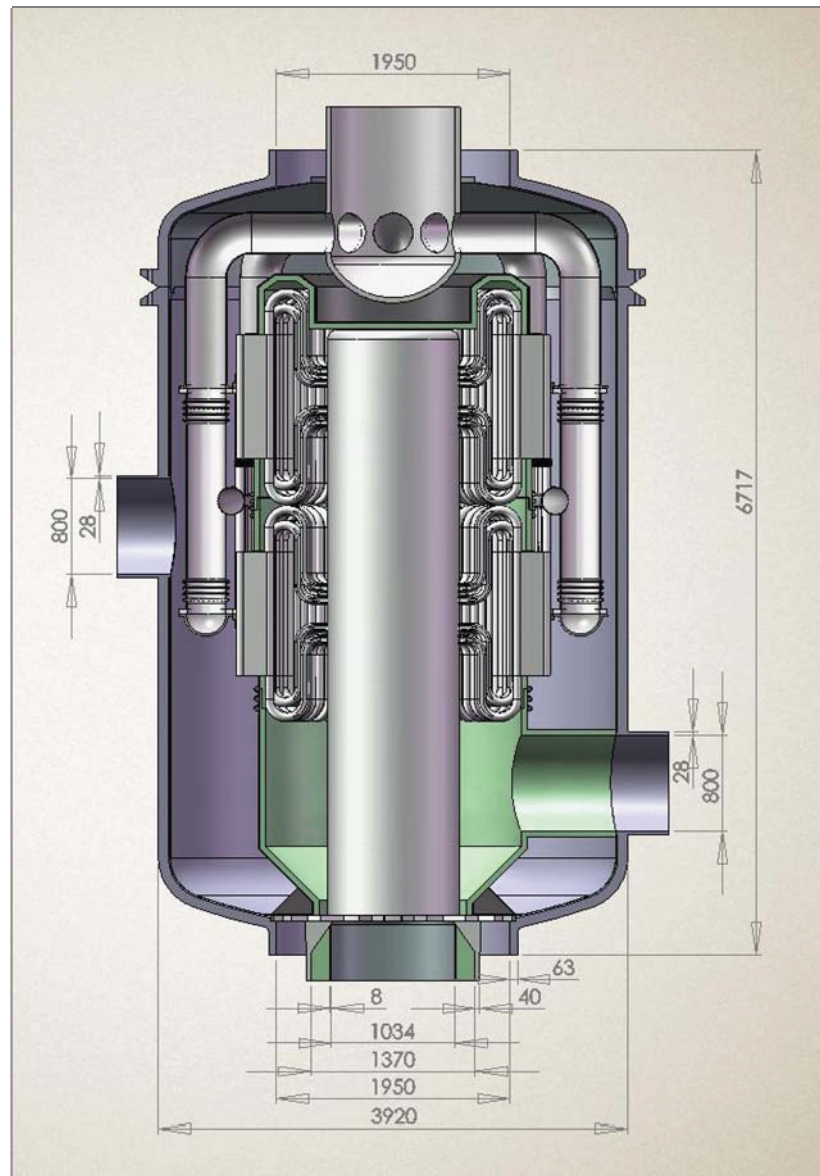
Dimensioned Cross Section of Option A IHX-A Assembly
